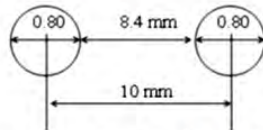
Dimensions [mm] of the holes drilled in the specimen
